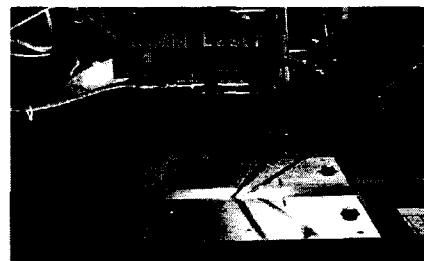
Experimental arrangement for CO₂ laser conduction bead on plate welding
